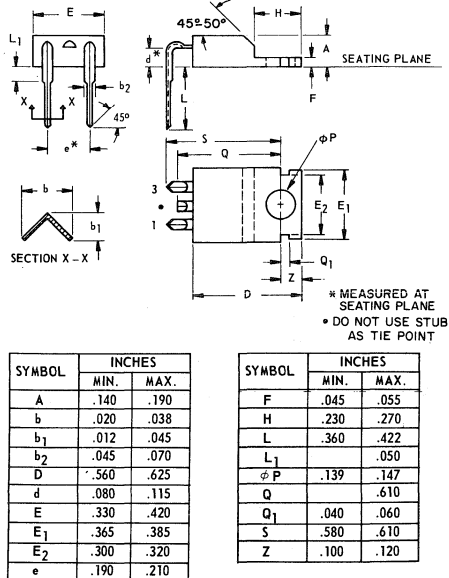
JEDEC TO-220AA Versawatt transistor package designed for direct replacement of the JEDEC TO-66 package.
